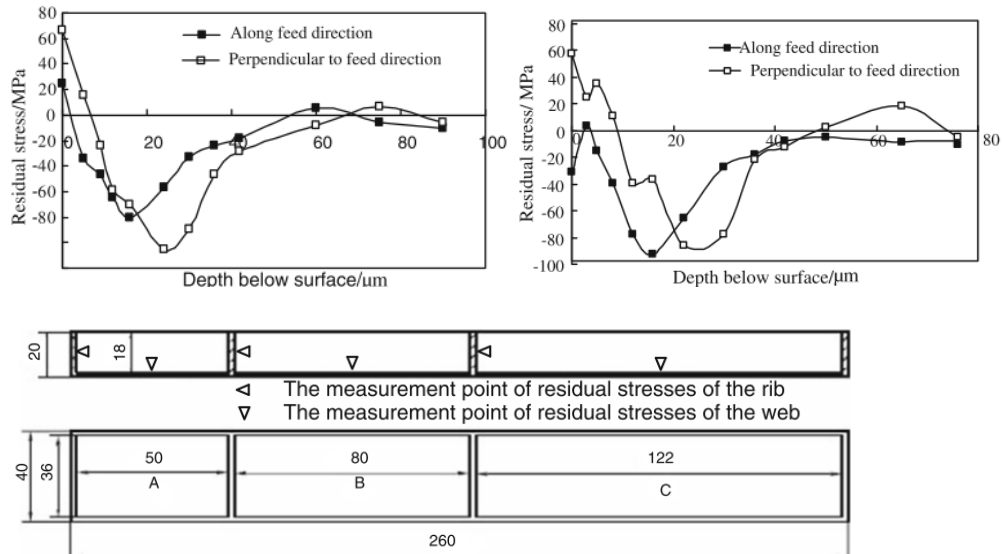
Machining induced residual stress on; (a) Measurements on rib section, (b) Measurements on web section, (c) Measurement locations [101].
